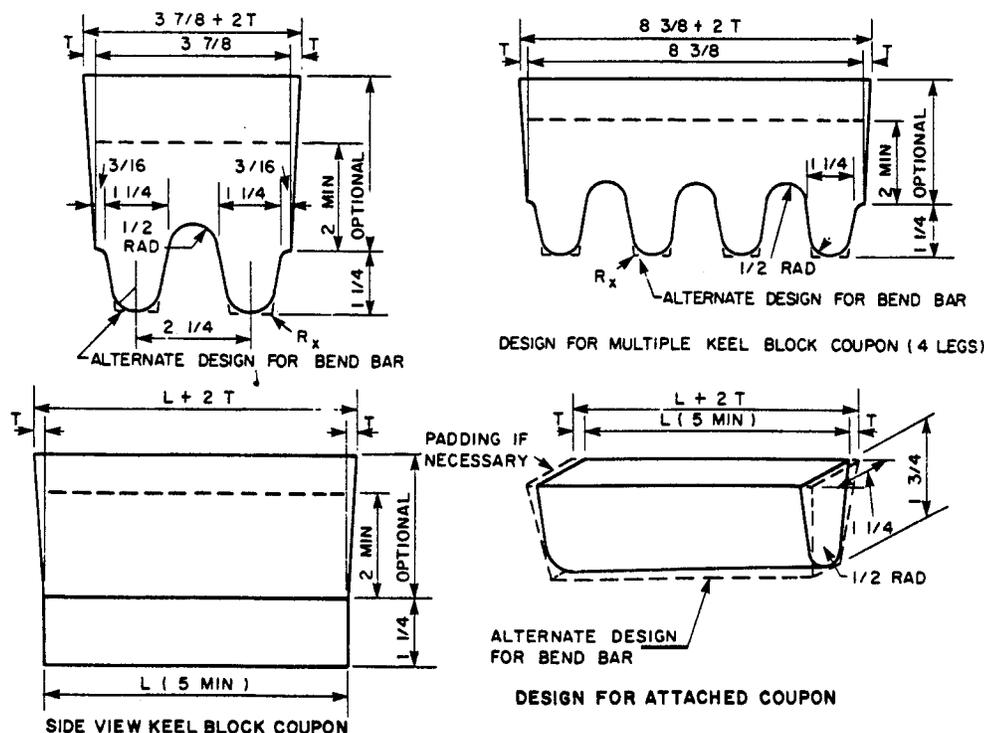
Keel block coupon (ASTM A370—mechanical testing of steel products). Conversion: 1 in. = 25.4 mm.
